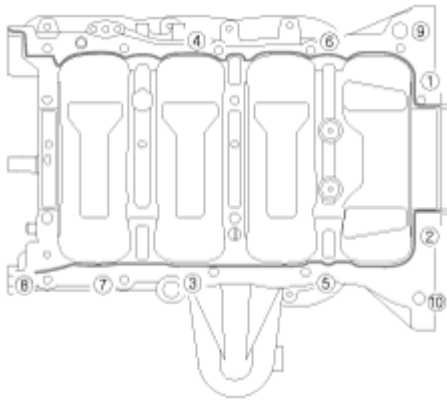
Identifying Ladder Frame Bolts Tighten Sequence
